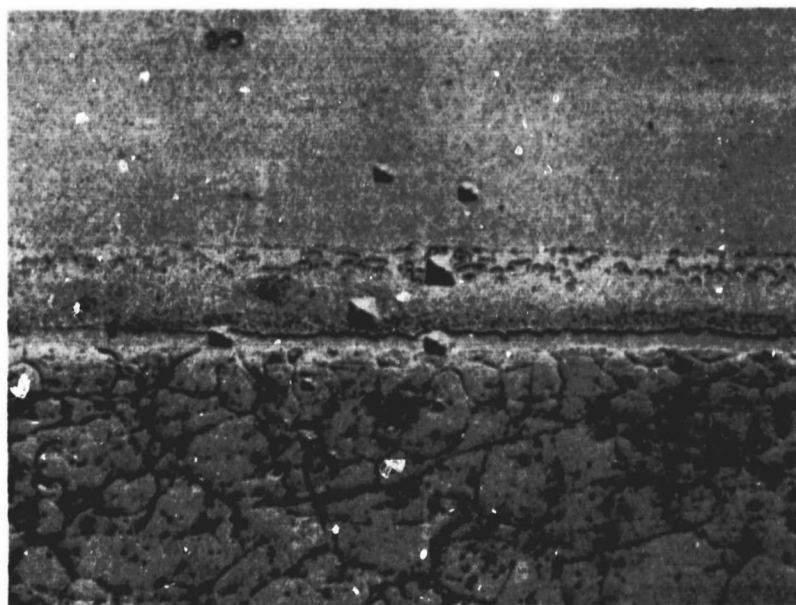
FAILURE IN WALL OF DUCT 38, COINCIDENT WITH FATIGUE CRACKS IN STAINLESS STEEL DAMPING SLEEVE
